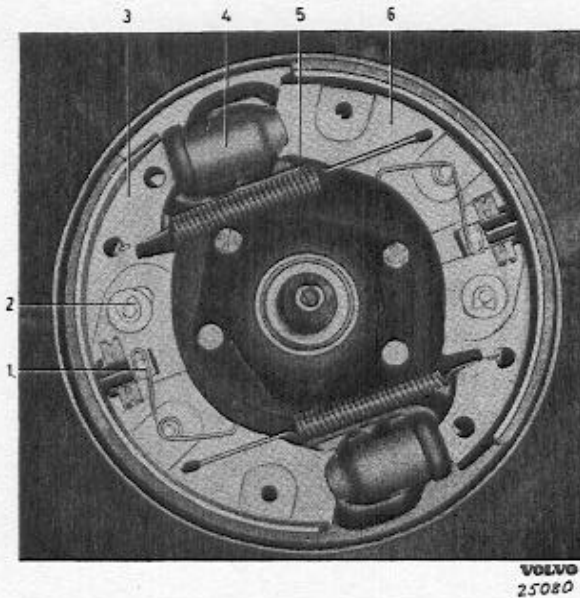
Wheel brake unit, early production, left-hand front wheel.
